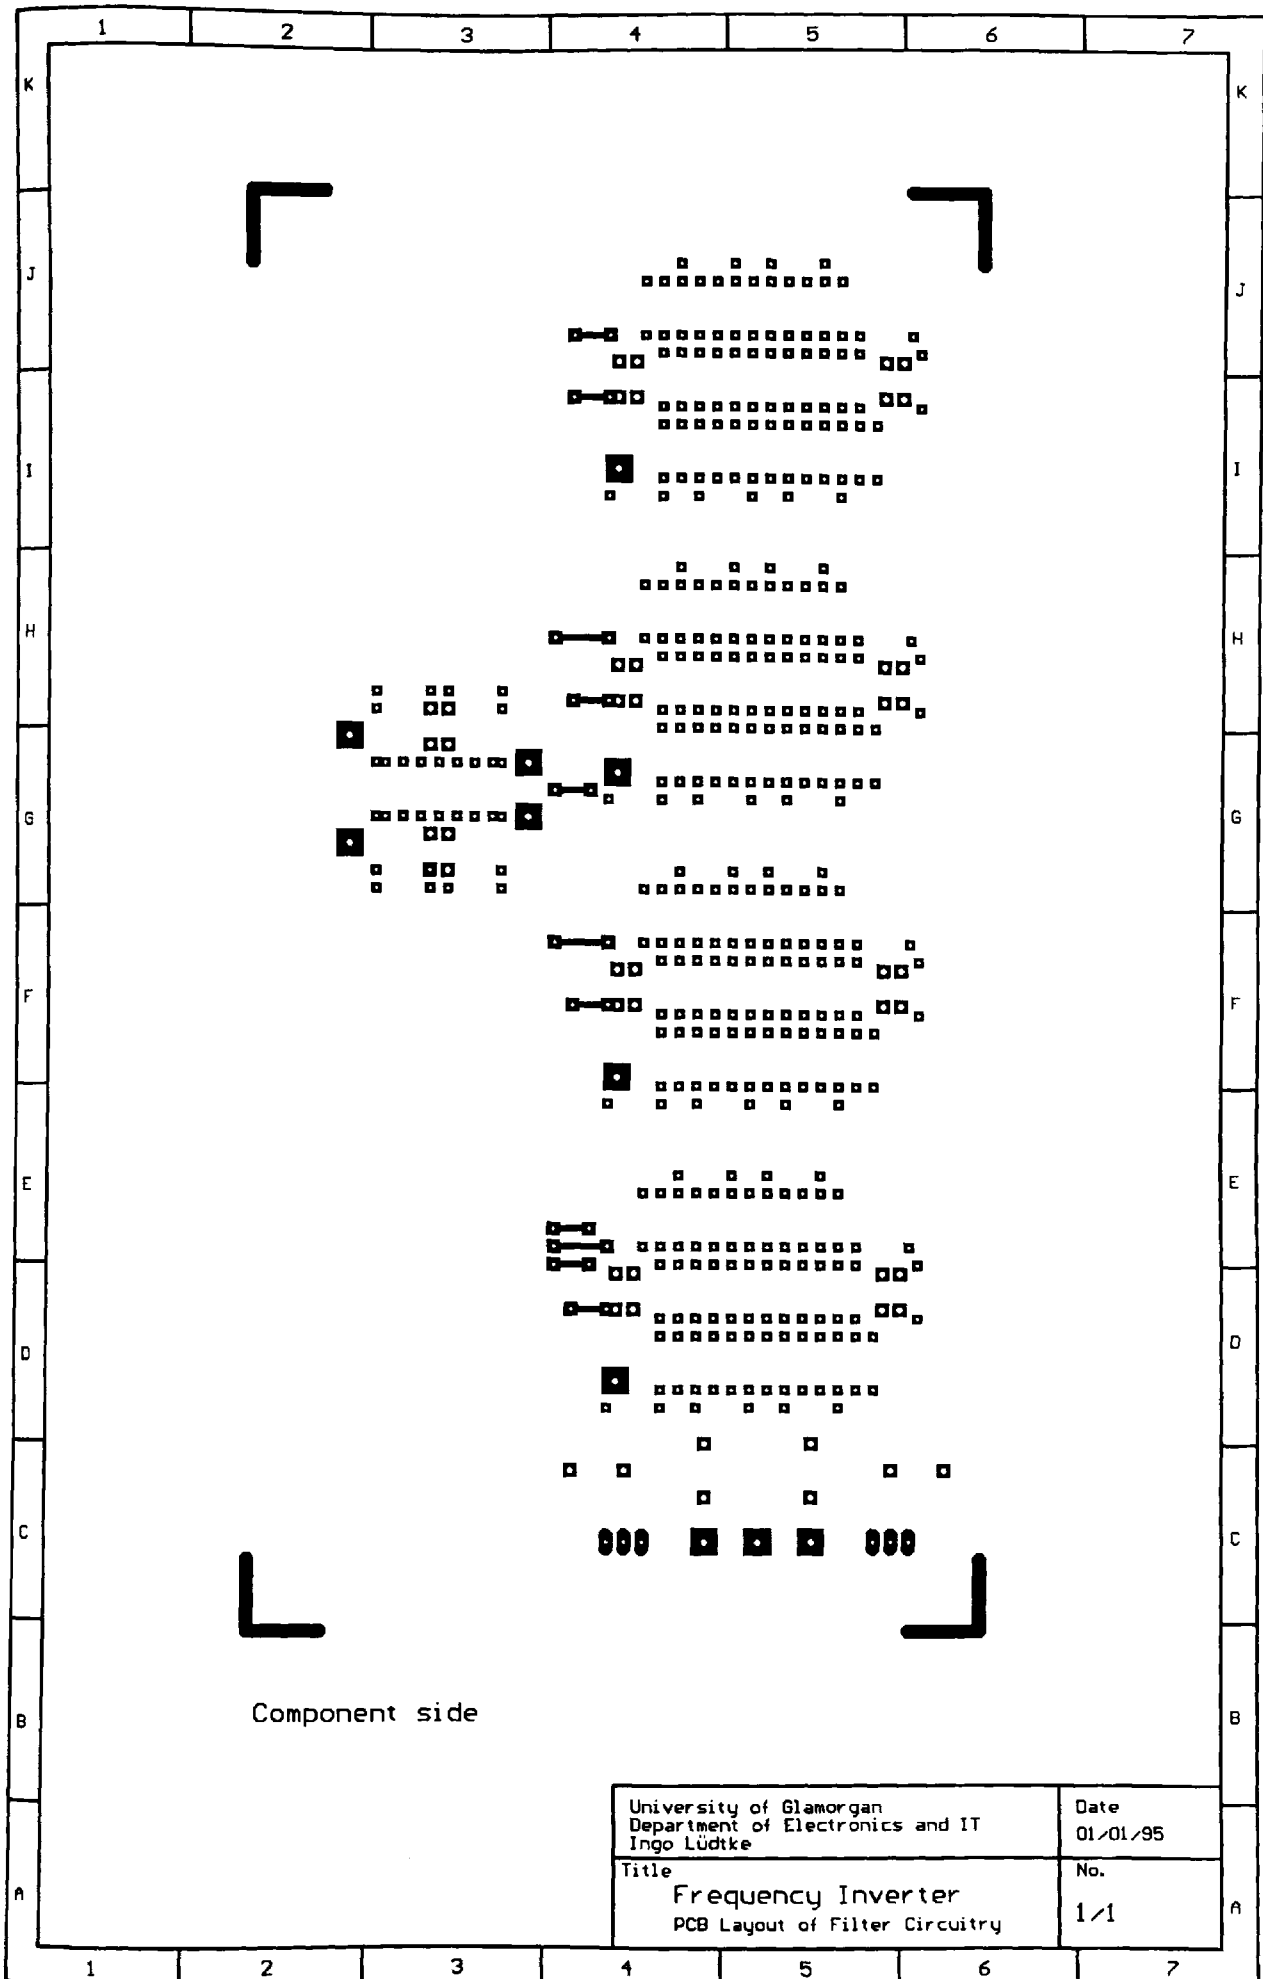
Component side PCB layout of the filter measurement circuit
